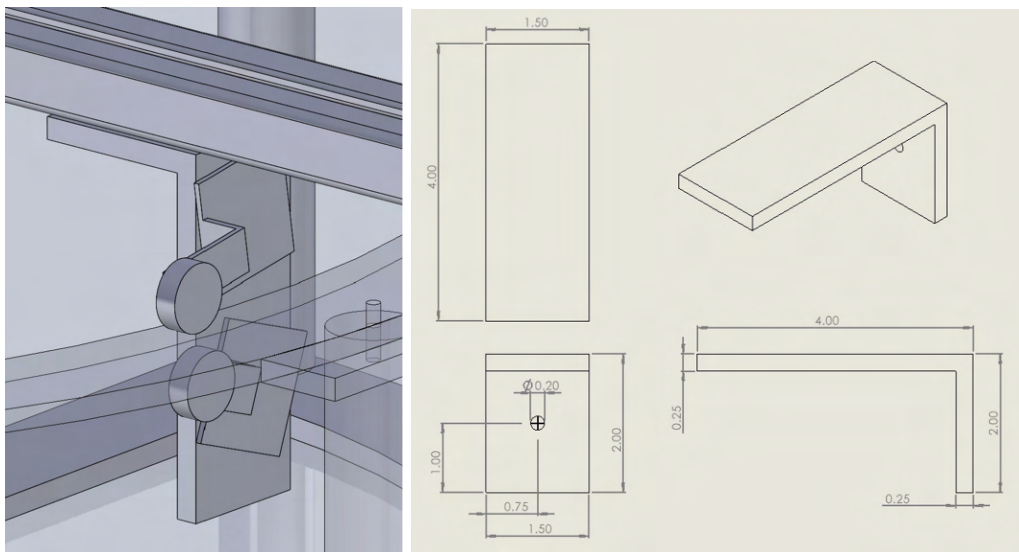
This figure shows the final design CAD assembly focusing on the angle bracket attachment to the slider arm and the wheels attached to the angle bracket and the engineering drawing of the angle bracket in the CAD. The point of attachment for the wheels will need to be determined so they are not shown on this drawing.
